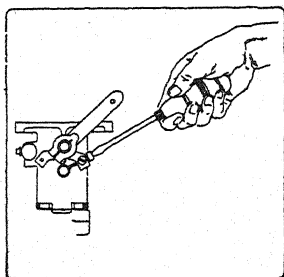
Adjusting throttle stop screw to regulate idling speed.
